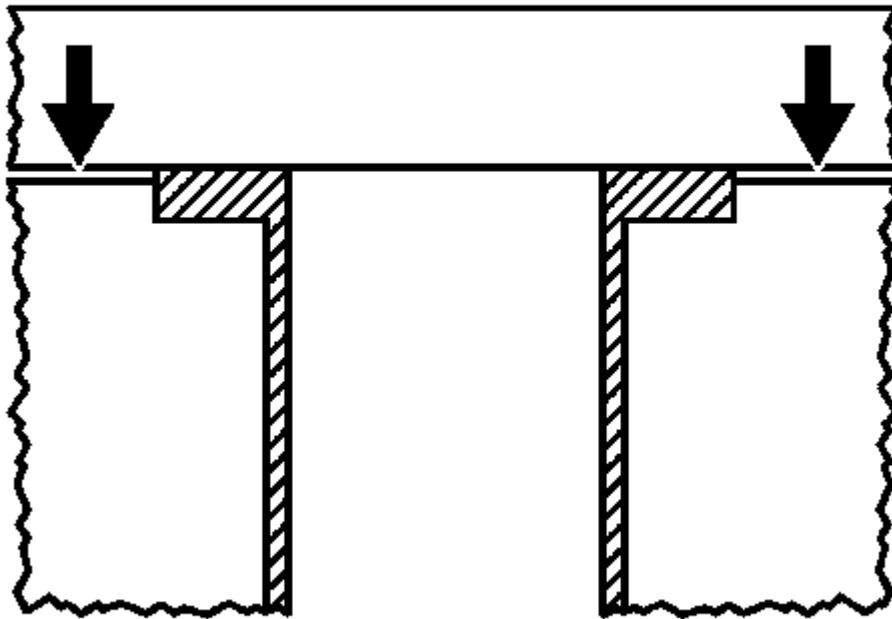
View Of For Properly Cut Cylinder Bore Sleeve
